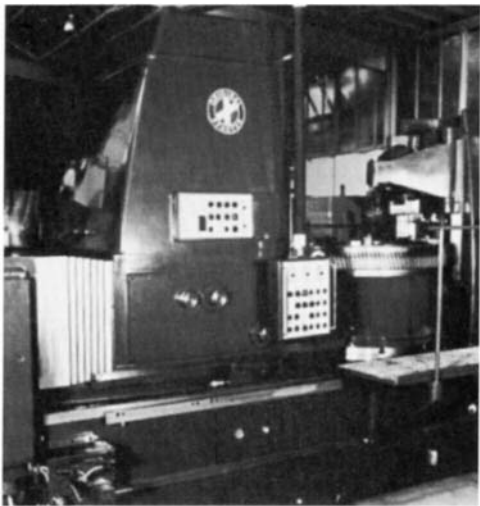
Drive of a hobbing machine. (*Siebling.*)
